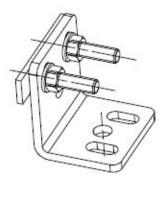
Accessories included in delivery, L-shaped mounting bracket, metal
